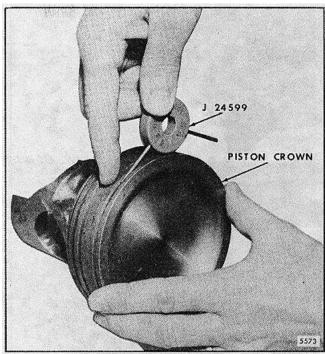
Checking Fire Ring Groove in Piston Crown
